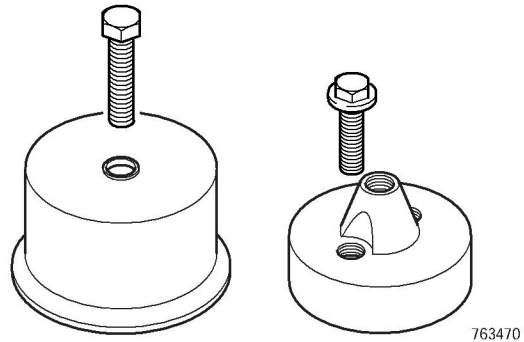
892/01157 Crankshaft Front Oil Seal Fitting Tool
